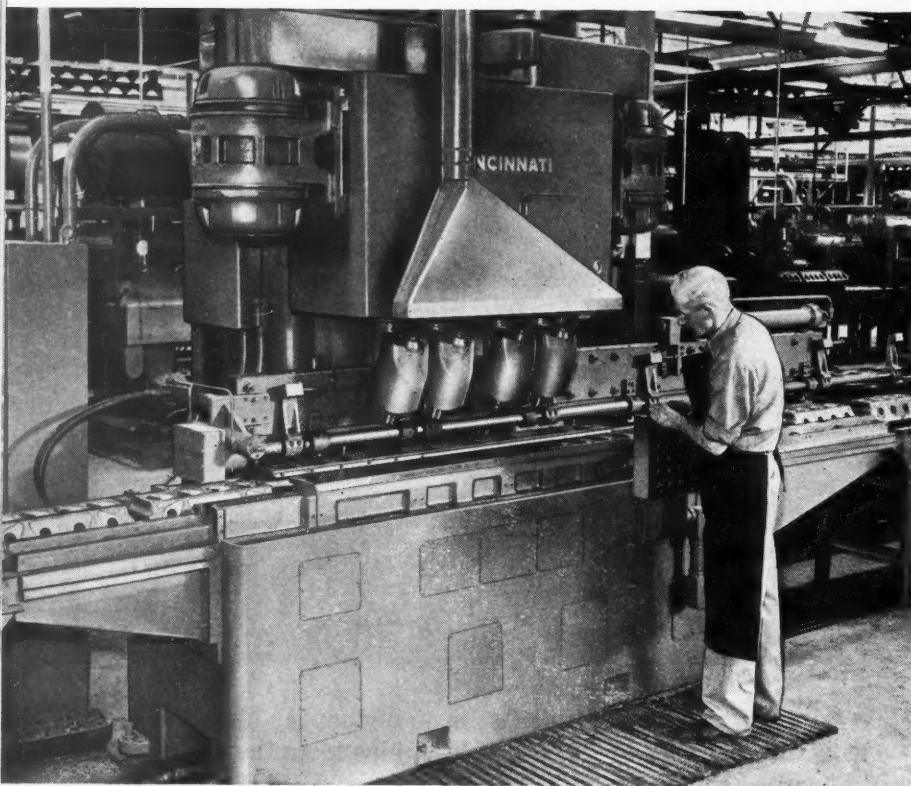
Hemispherical combustion chambers in the cylinder heads are form-milled, four at a time, on a four-spindle, transfer type milling machine
